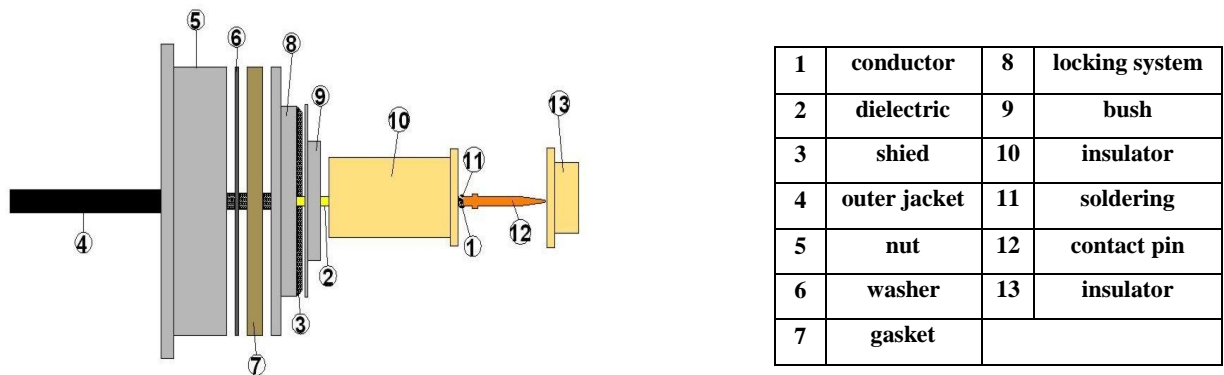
Schematic representation of the connector. (1) Conductor; (2) Dielectric; (3) Shied; (4) Outer-jacket; (5) Nut; (6) Washer; (7) Gasket; (8) Locking system; (9) Bush; (10, 13) Insulator; (11) Soldering; (12) Contact pin; (13) Insulator.
